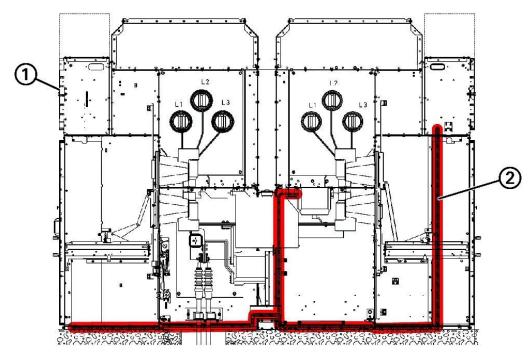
Laying of low-voltage cables, with view onto panel A (1), right inner side of panel
